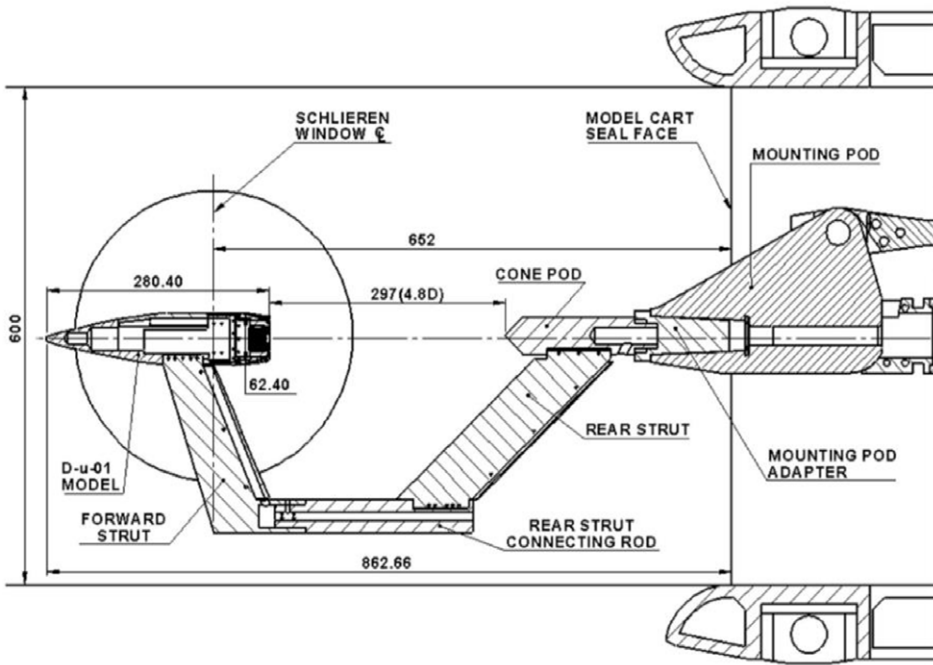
Schematic of 1:2.5 model mounted on regular pod in supersonic test section.
